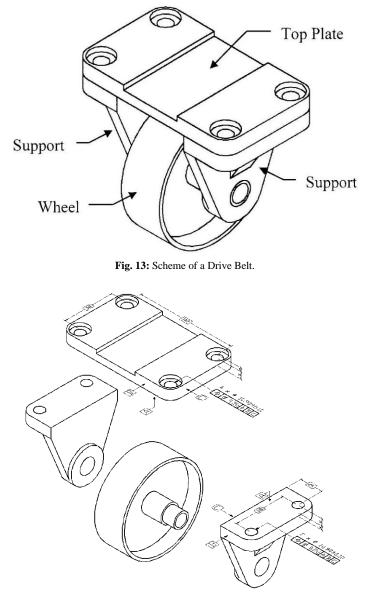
Components and Tolerances of A Drive Belt.
